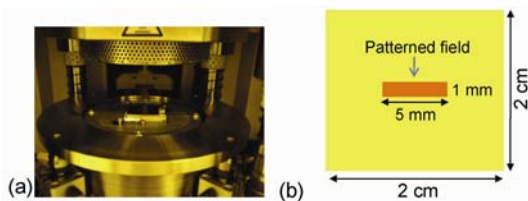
(a) Photograph of hot-emboss system and (b) Schematic of mold design
